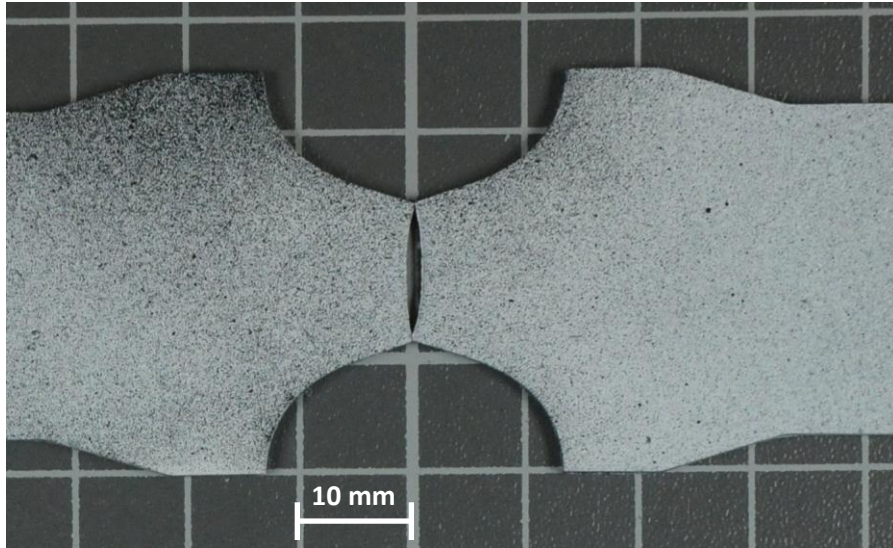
Photograph of fracture of DP800 plane-strain specimen
